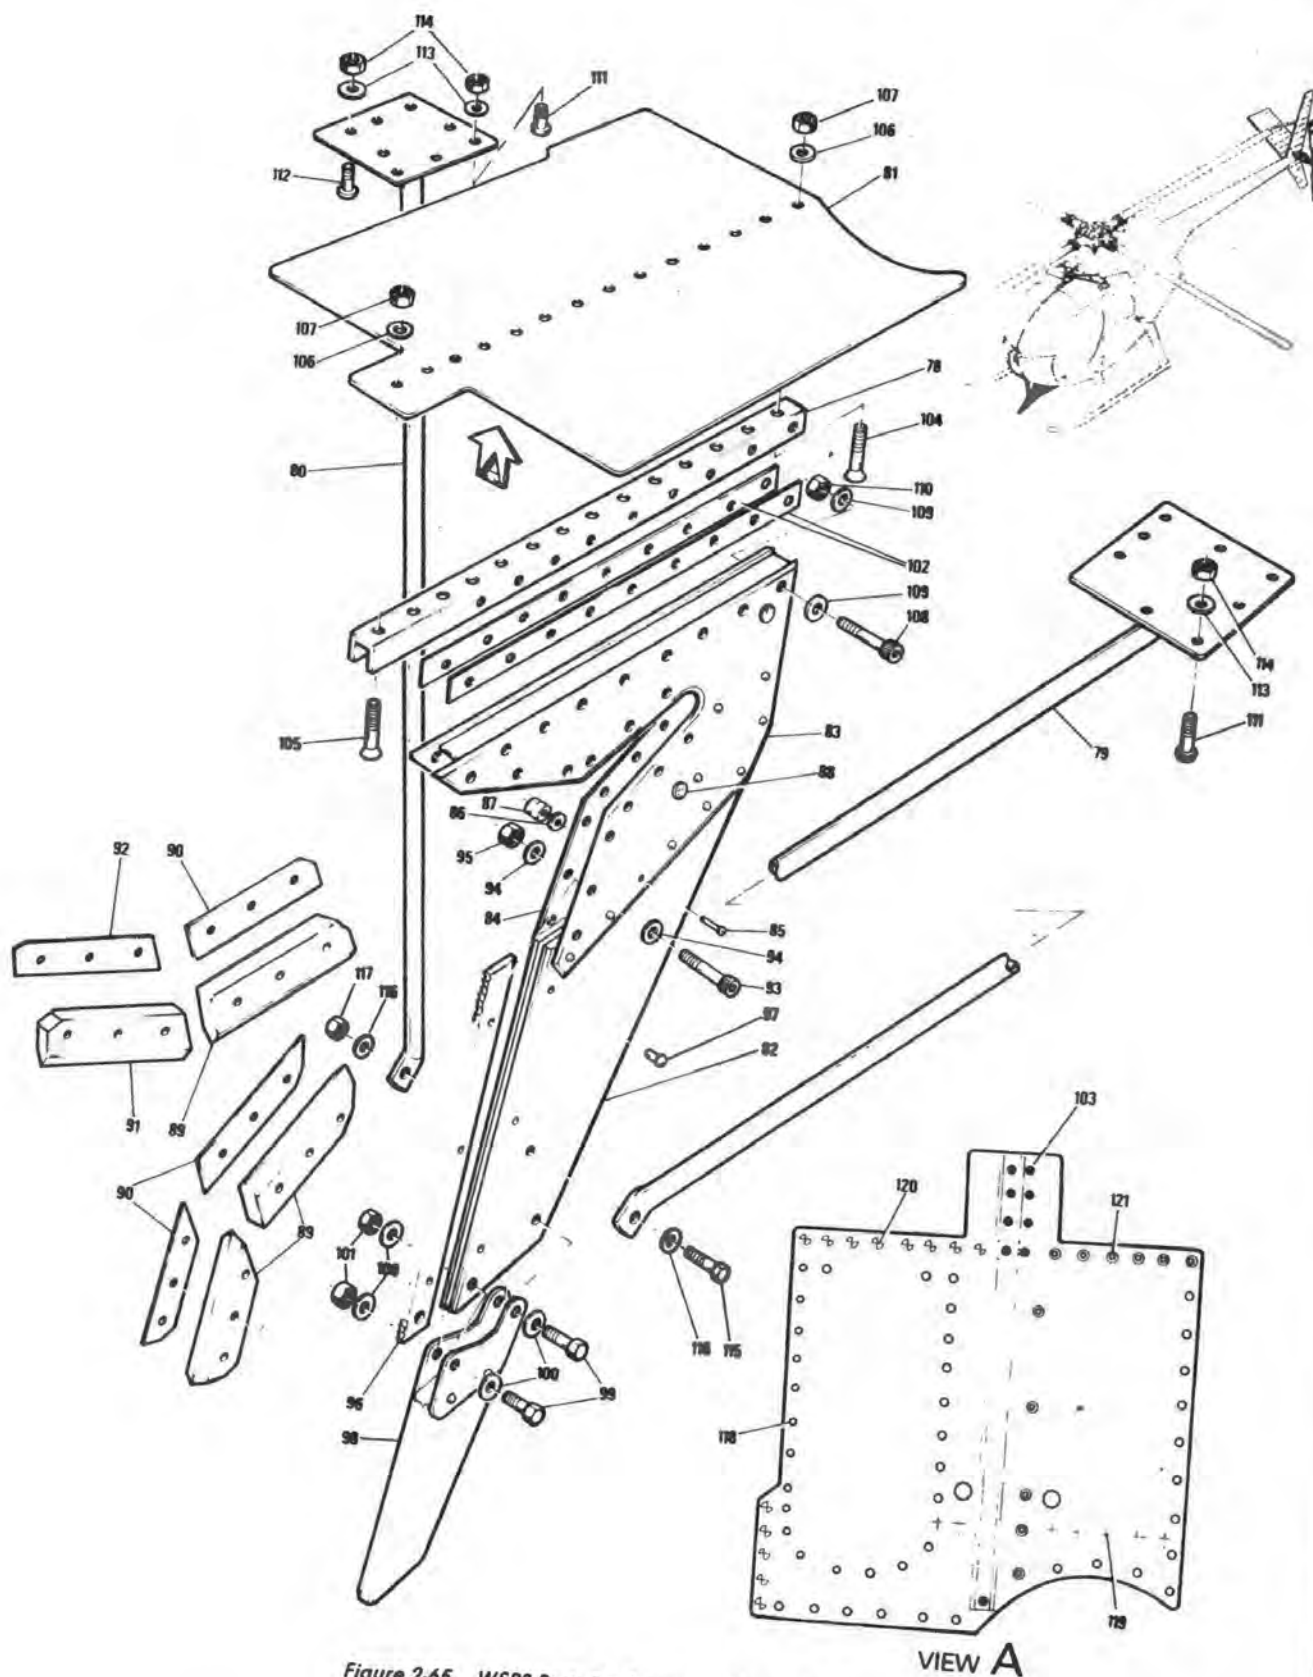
WSPS Parts Replacement Sheet 3 of 4
